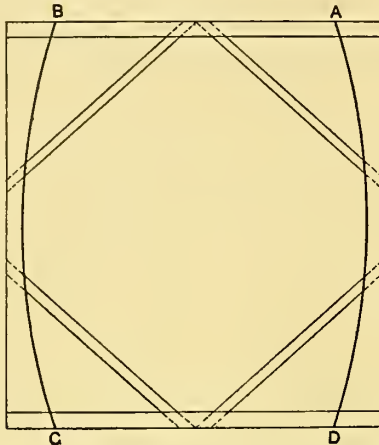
FORM OR FRAME TO MARK SHEET AFTER BEING DISHED.
